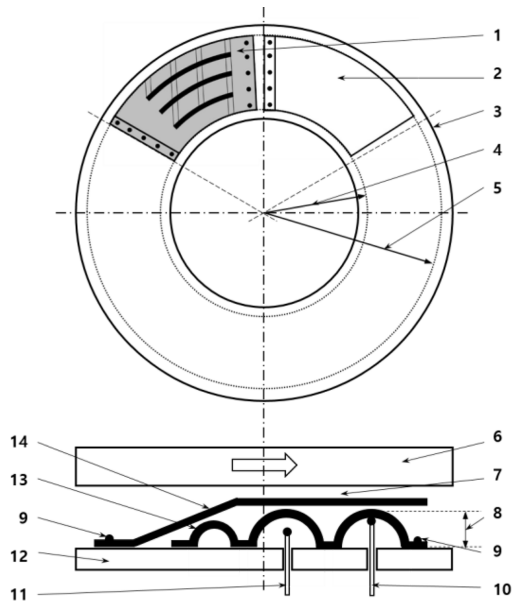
Schematic of foil thrust bearing: 1 - bump foil, 2 - top foil, 3 - bearing plate, 4 - inner radius of top foil, 5 - outer radius of top foil, 6 - runner, 7 - air film, 8 - bump height, 9 - welding point, 10 - thermocouple for measuring bump foil surface temperature, 11 - thermocouple for measuring air temperature, 12 - bearing plate, 13 - bump foil, 14 - top foil.
